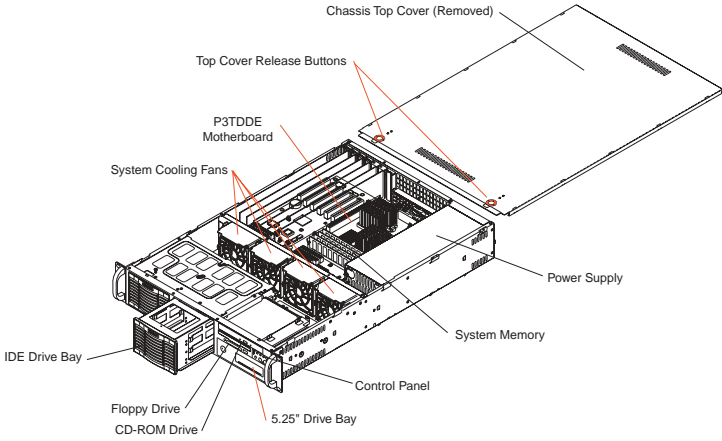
Accessing the Inside of the SuperServer 6021i (with one IDE drive bay removed)
